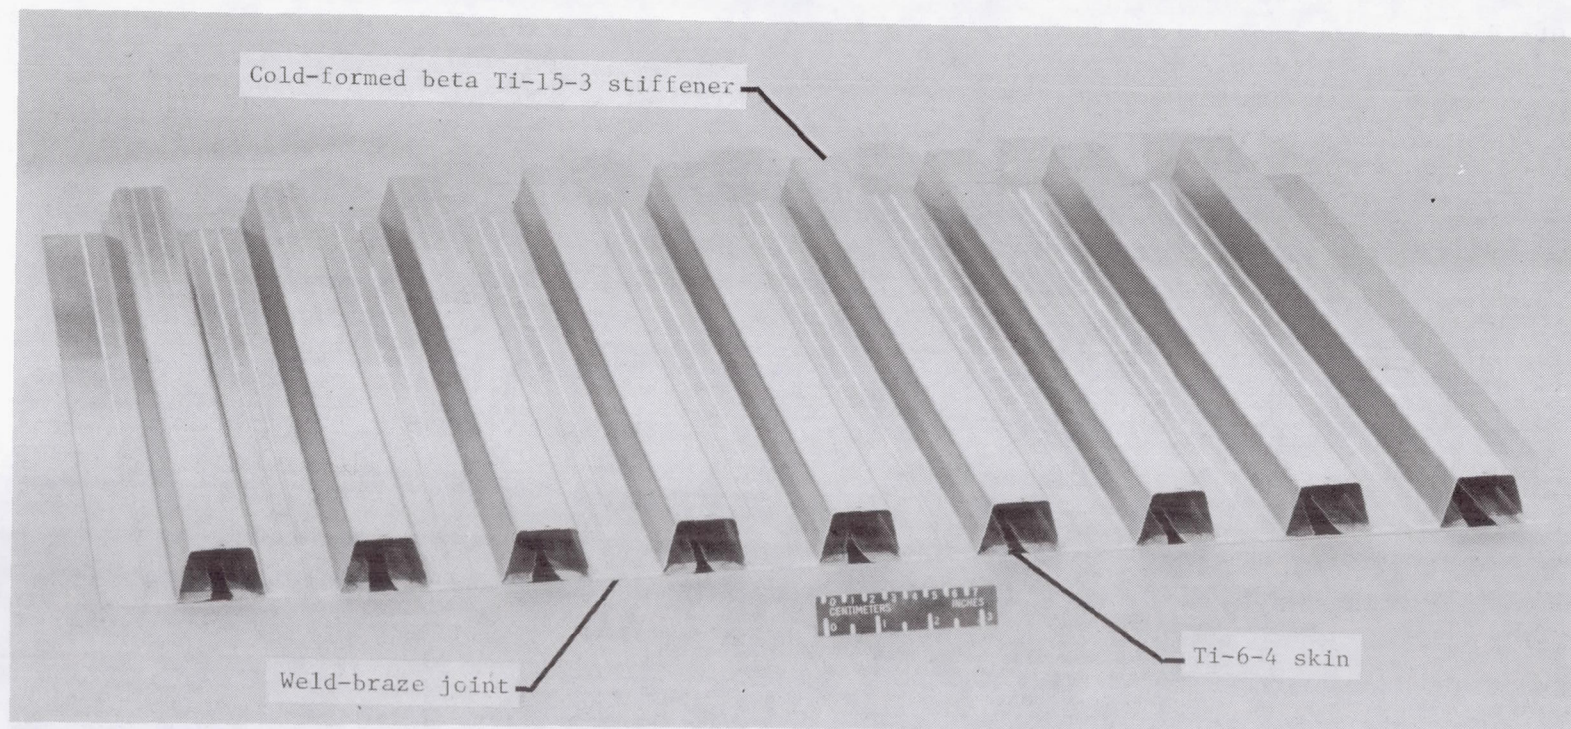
Multi-stiffener panel assembly after brazing and before trimming.
